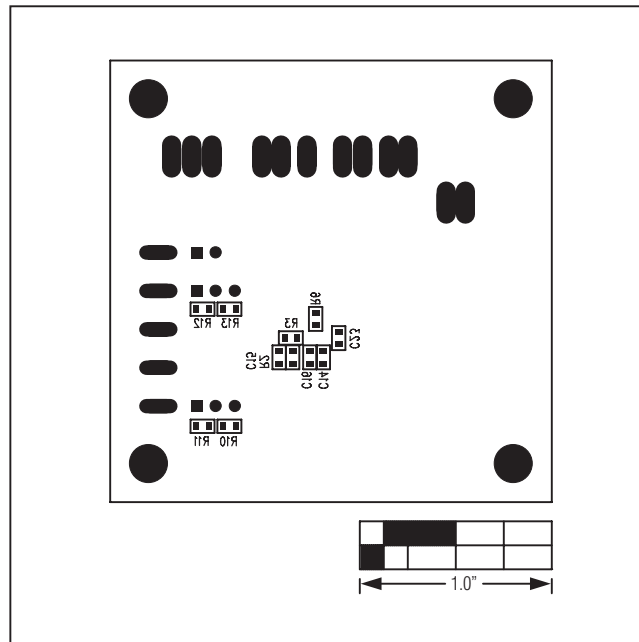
MAX15109 EV Kit Component Placement Guide—Solder Side
